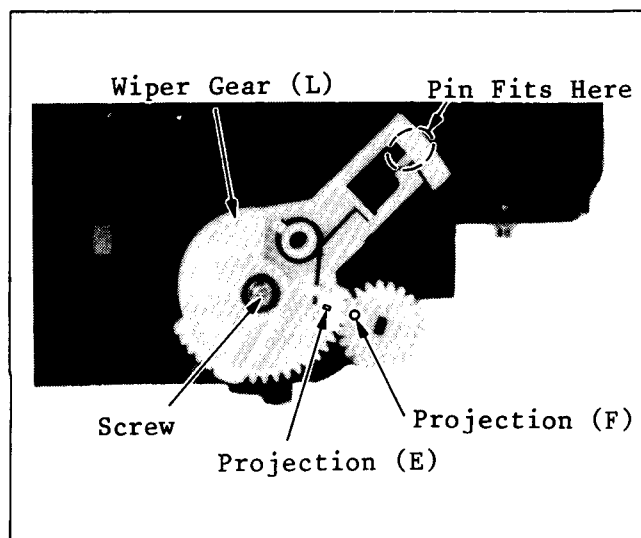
Adjustment of Cassette Up Gears-(9)
